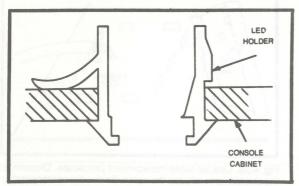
Cross-sectional view of seated LED holder in the console cabinet.
